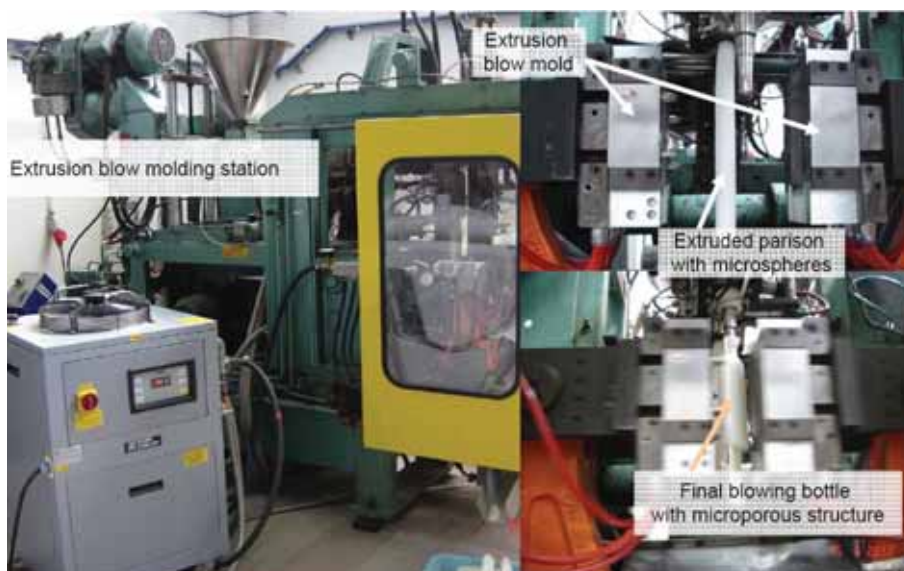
Extrusion blow molding machine to realizing MM-EBM process
